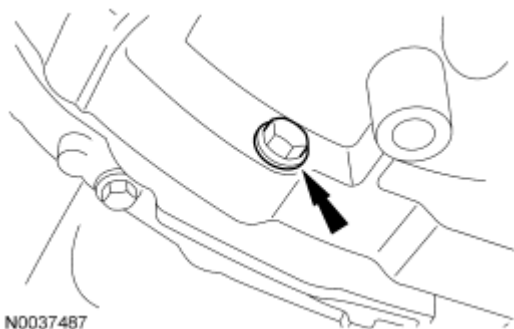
Locating Bellhousing-To-Oil Pan Bolt
